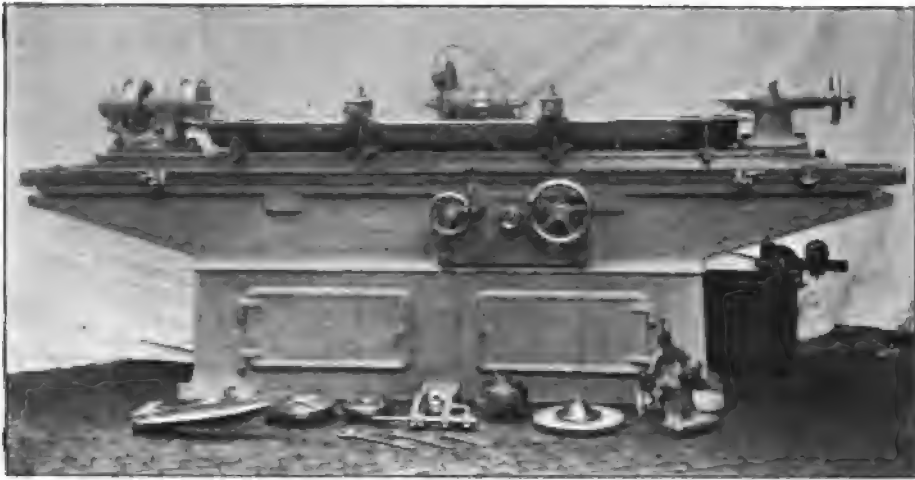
A UNIVERSAL GRINDING MACHINE BUILT BY MESSRS. G. BIRCH & CO., MANCHESTER, ENGLAND
